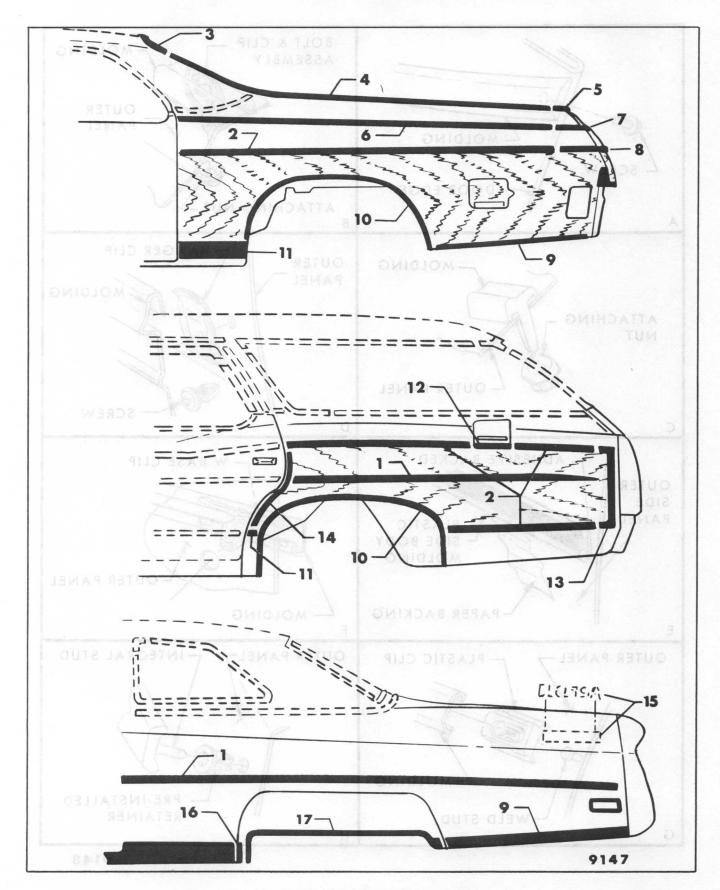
Typical Lower Quarter Exterior Moldings
